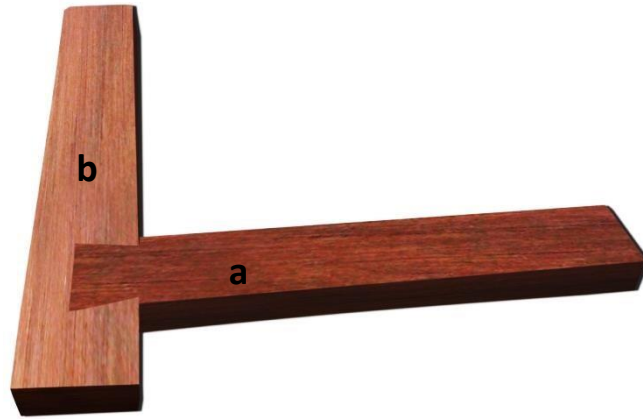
Rail (a) and Leg (b) boards fitted to form a dovetail joint.
